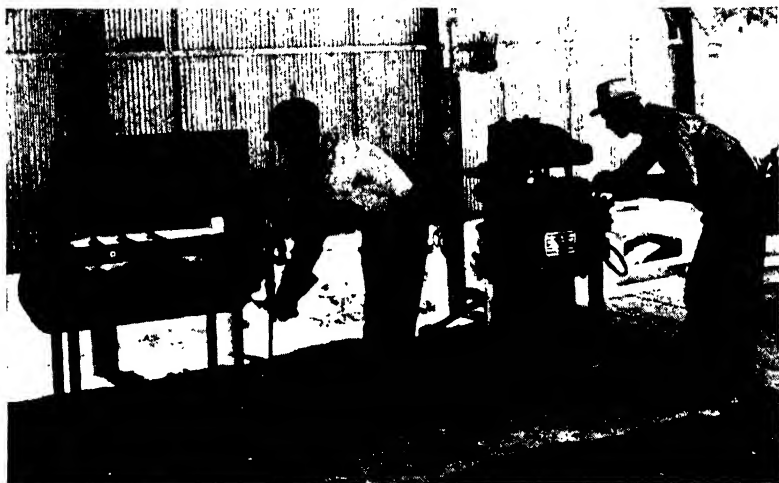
Oil-burning forge and drill sharpener for forging bits on drill steel.
